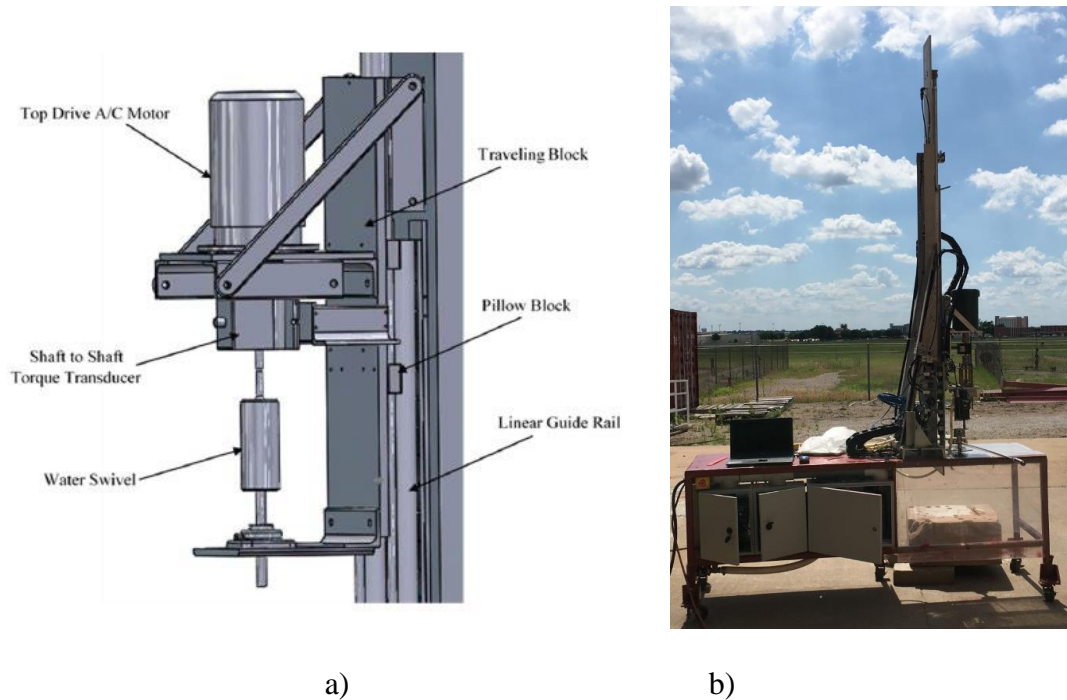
a) CAD drawing of a mini drilling rig (Akita et al, 2018). B) Actual mini rig
